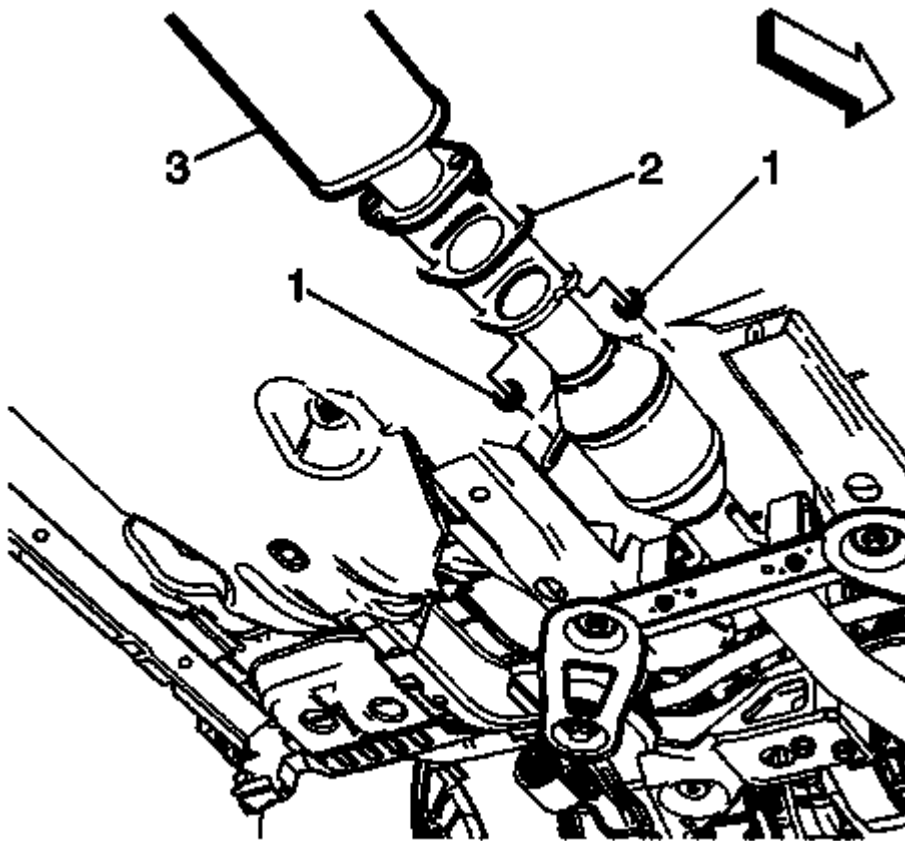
Exhaust Front Pipe And Exhaust Muffler Fasteners
